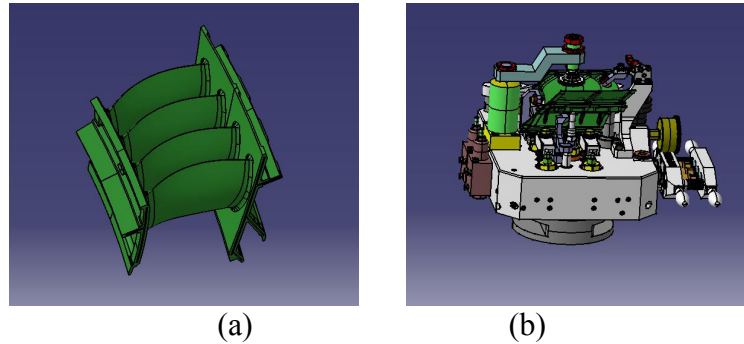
3D model of: (a) part. (b) part mounted on its fixture.
